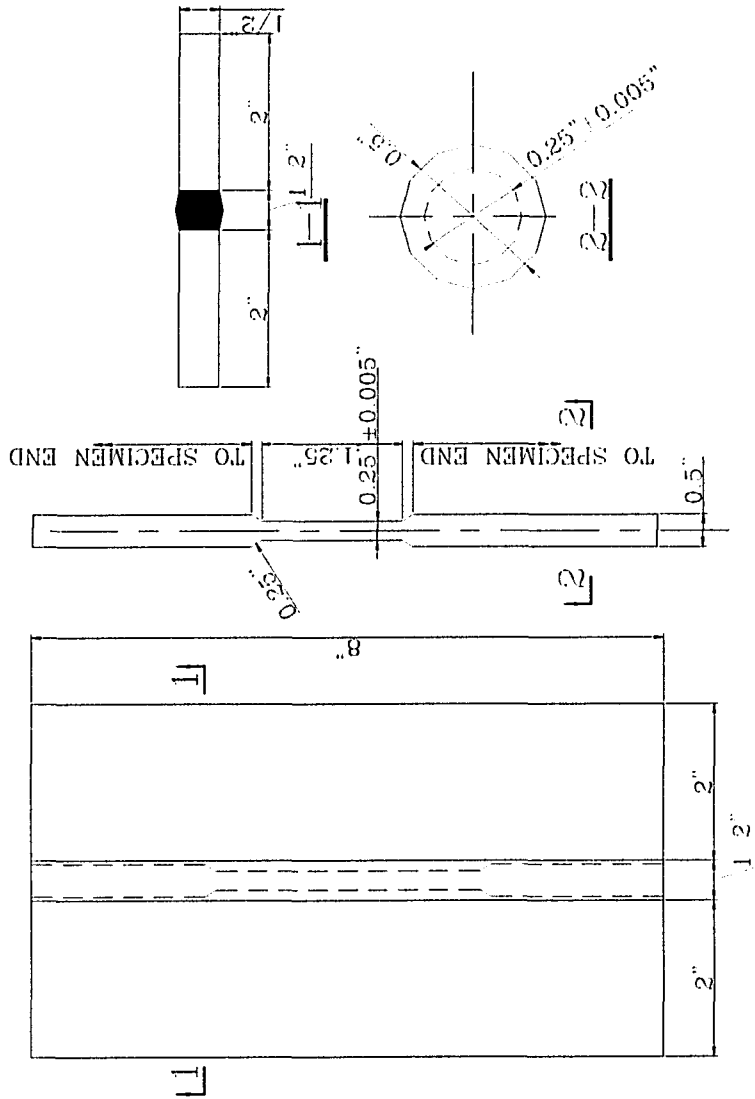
Welding Material Cylindrical Coupon
